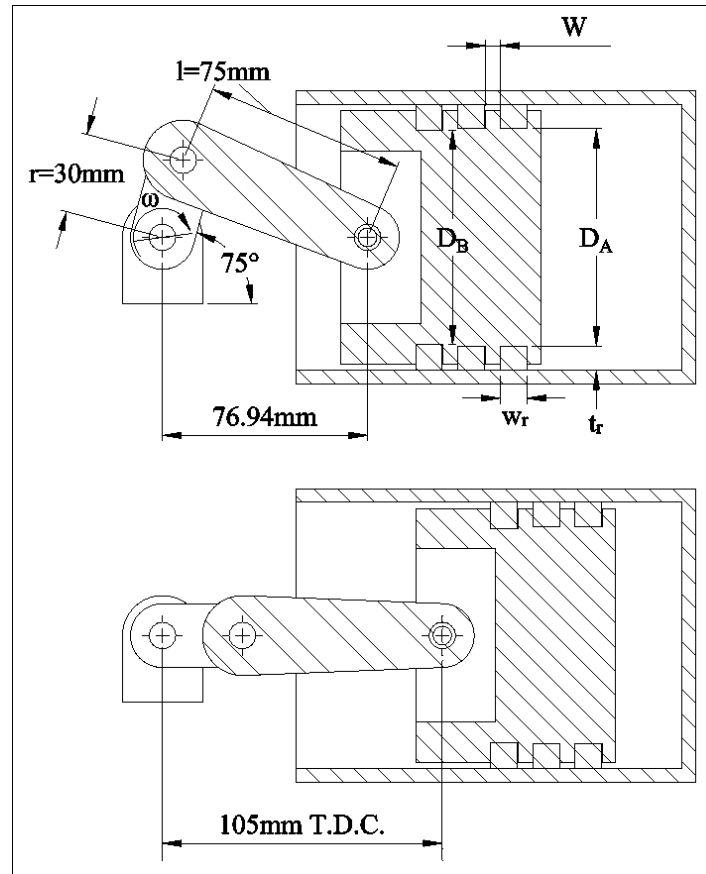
, Clevis, Crank, And Link Dimensions and Piston Travel Distance to Top Dead Center with an Initial Crank Angle of 75 Degrees from Horizontal
